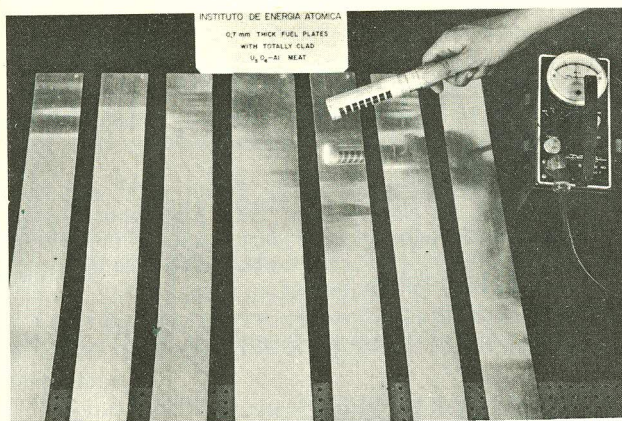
0.7 mm thick fuel plates (ends of the plates)
